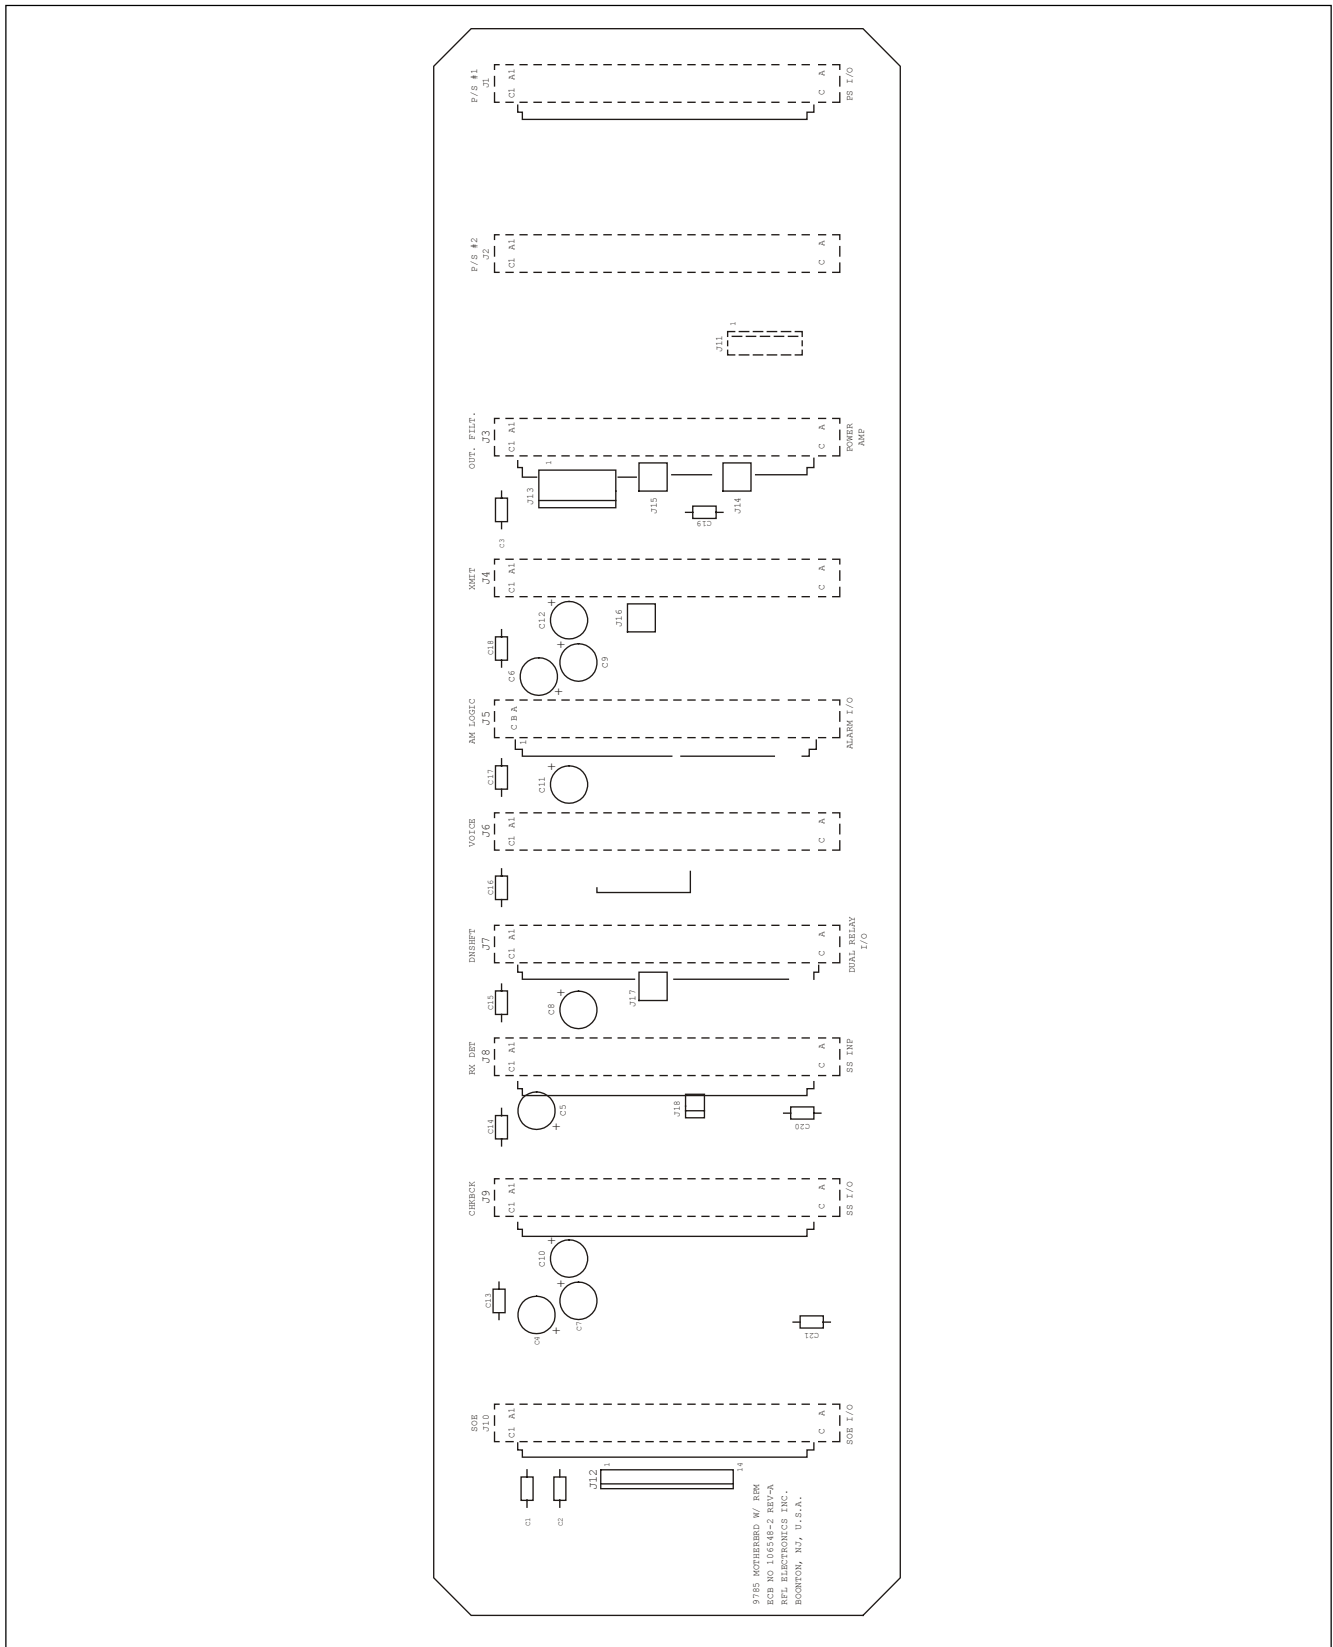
Component locator drawing, RFL 9785 Tx/Rx Motherboard.
